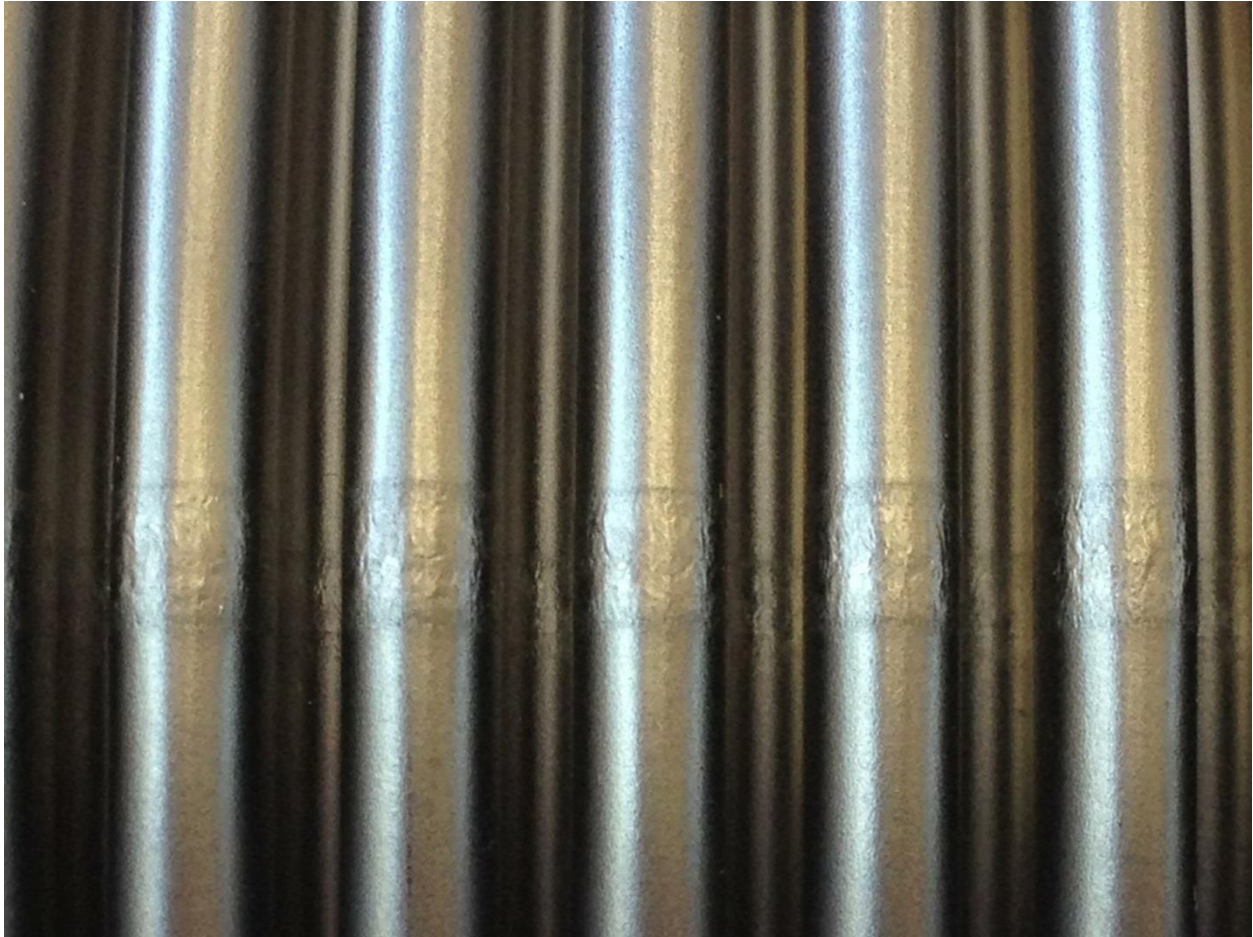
Titanium bellows showing the weld. This weld leaked in Fermilab CM-2
